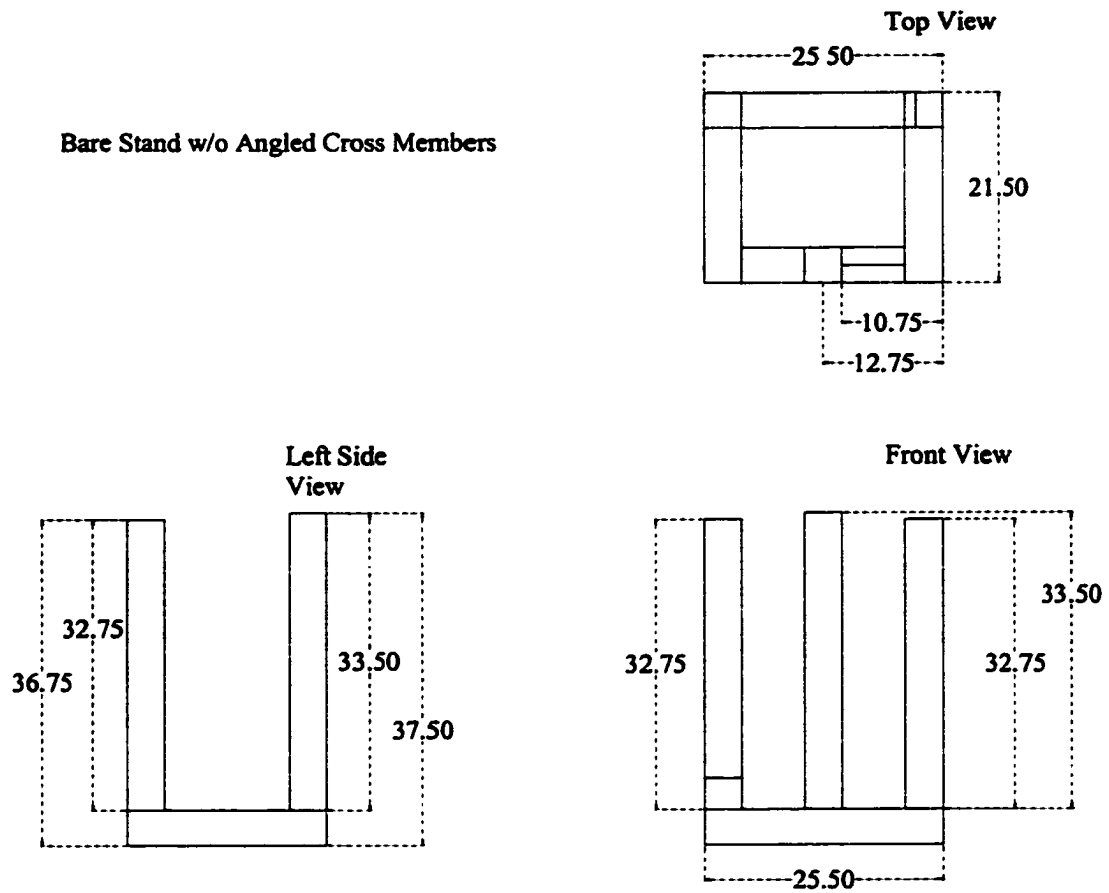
Design drawings for the STM Vacuum Chamber Stand depicting 4 × 4 inch tubes only.
